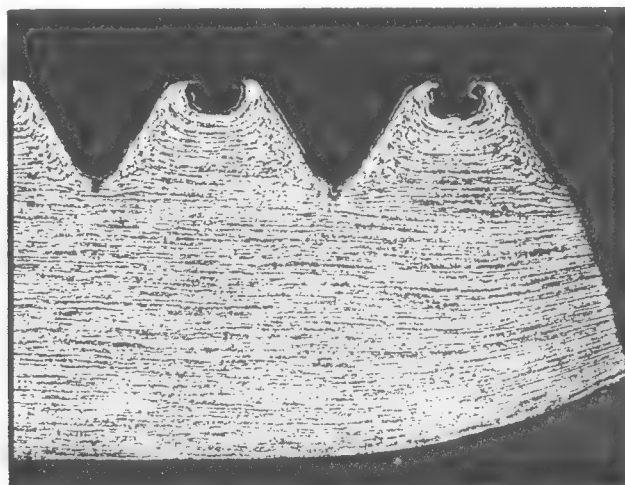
Cross section of threads showing corrosion fatigue cracks
